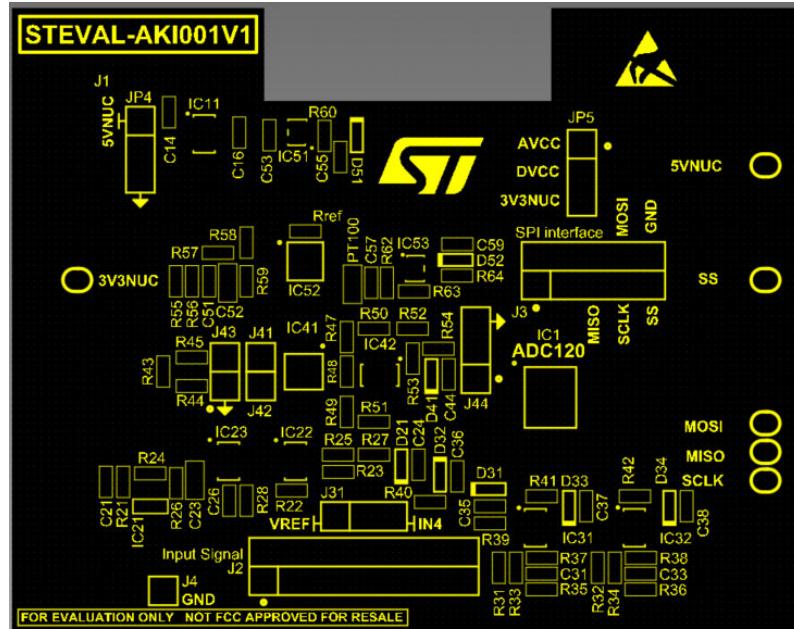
STEVAL-AKI001V1 board bottom silkscreen
